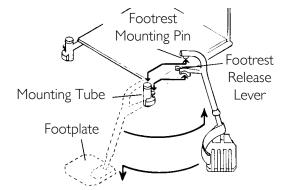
Installing/Removing Footrests - 70° and 70° Taper
